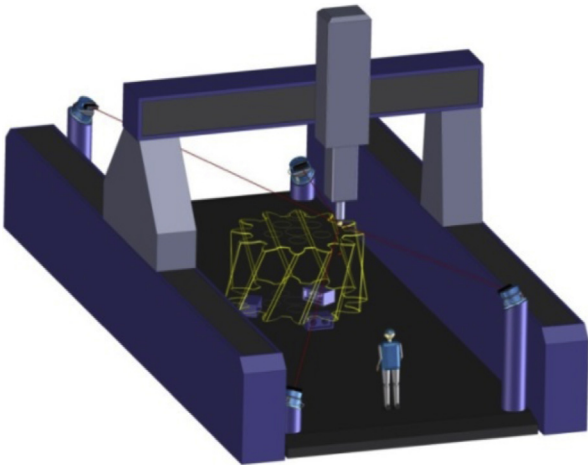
Mobile measuring machine for three-dimensional measurements.
